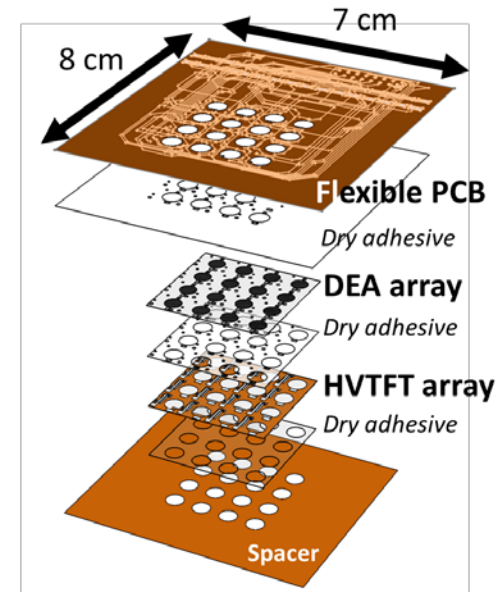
Exploded view of 4x4 Haptic Display. Exploded view of the entire DEA-TFT assembly: Layers are attached using a dry adhesive, which is also used as a solder-mask. Through the solder-mask, we cast conductive glue at the position of the DEA topside and backside electrode, the HVTFT source, drain and gate electrode. By attaching the flexible PCB to the DEA and the TFT layer the conductive glue creates an electrical contact between the DEAs and the TFTs.
